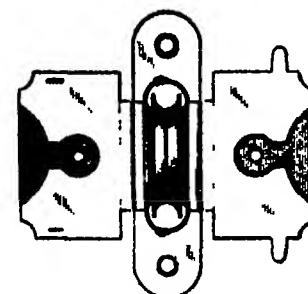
Housing and attaching flange for sash pulleys, designed by W. J. Krueger
